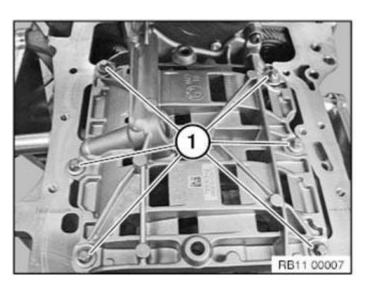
Removing Oil Vacuum Pump Courtesy of BMW OF NORTH AMERICA, INC.
